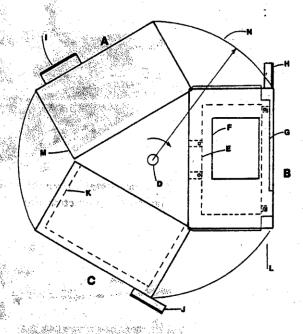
Rotary Station Cut Sheet Forming Press - Custom Automated Machinery (15). A: Heating Station. B: Forming Station. C: Load/Unload Station. D: Drive Center. E: Platen. F: Motor Well. G: Pit. H: Platen Control Panel. I: Oven Control Panel. J: Clamp Control Panel. K: Rotating Center Structure. L: Vacuum Service. M: Air Service. N: Safety Guard. (Drawing by permission of Fred Pollack, President, Custom Automated Machinery, Inc.)
